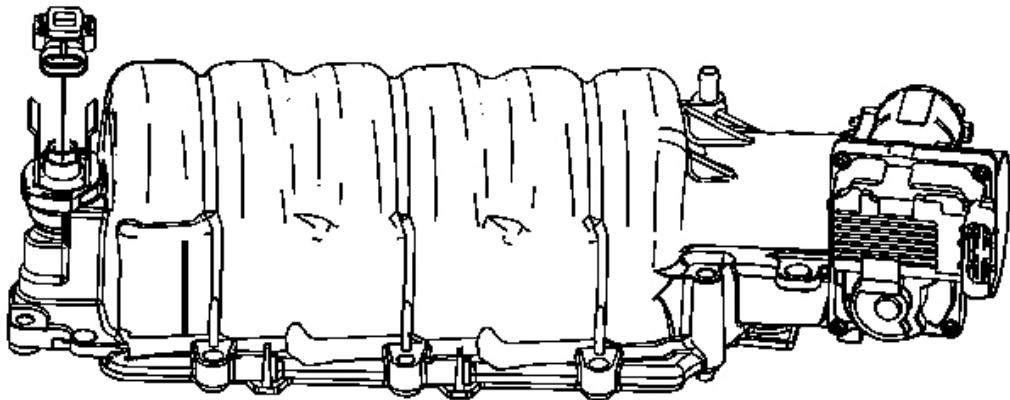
Locating EVAP Purge Solenoid & Bolt
